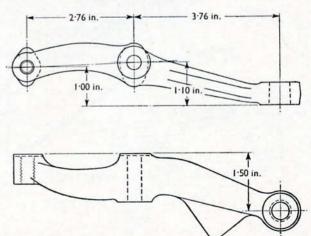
Steering arm checking dimensions. The dimensions apply to right-hand and left-hand arms
